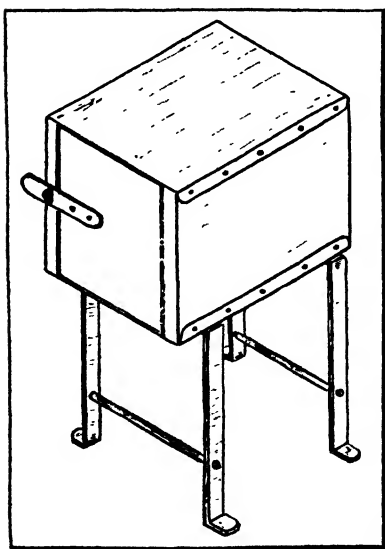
OVEN TO STAND OVER A SOLDERING STOVE.
